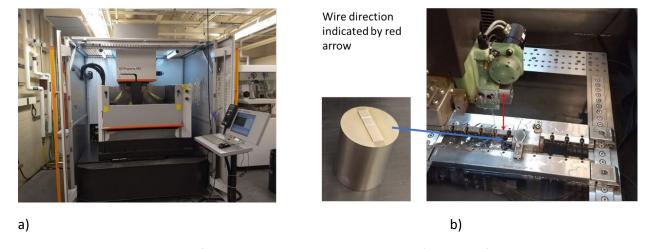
Wire EDM used to fabricate the step height prototype, a) picture of the wire EDM machine, b) view inside the wire EDM tank and the prototype after the cutting was finished. The red arrow indicates the direction of the wire.
